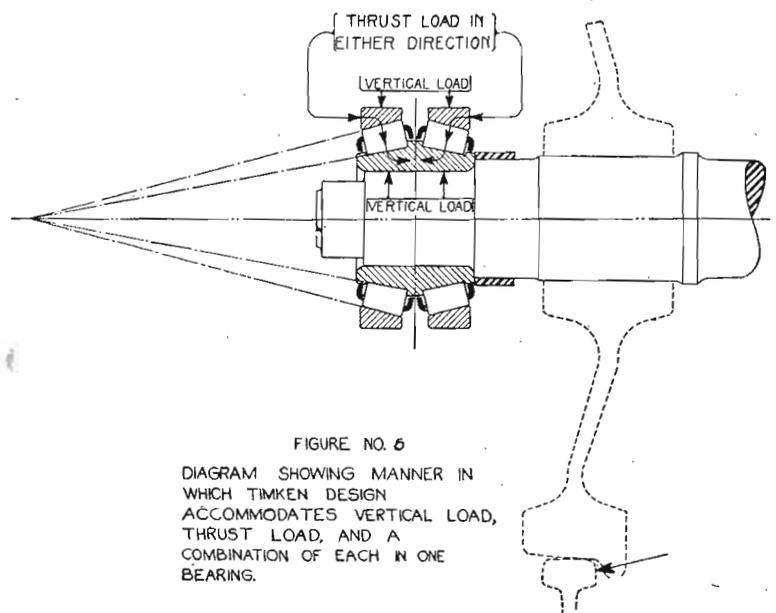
Showing Manner In Which Tapered Roller Bearings Carries Vertical and Thrust Load In One Bearing
